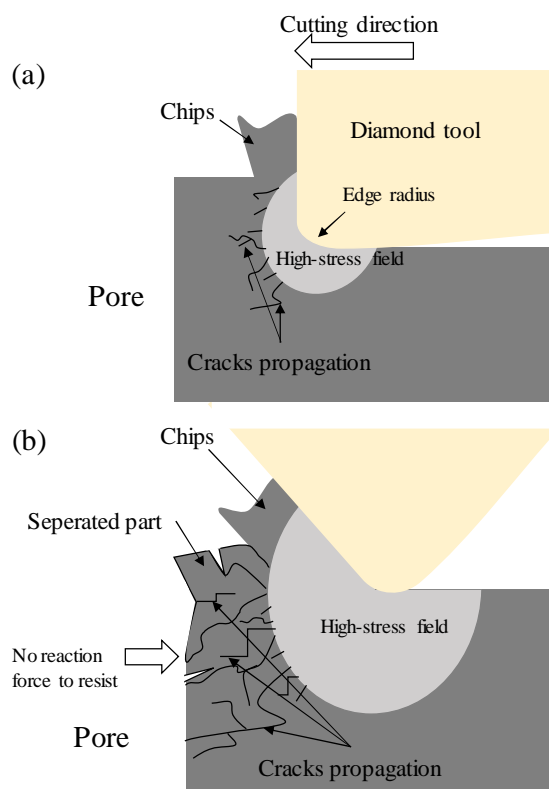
Schematic illustrations of brittle fracture near a pore at two different tool rake angles: (a) zero (b) -45°
